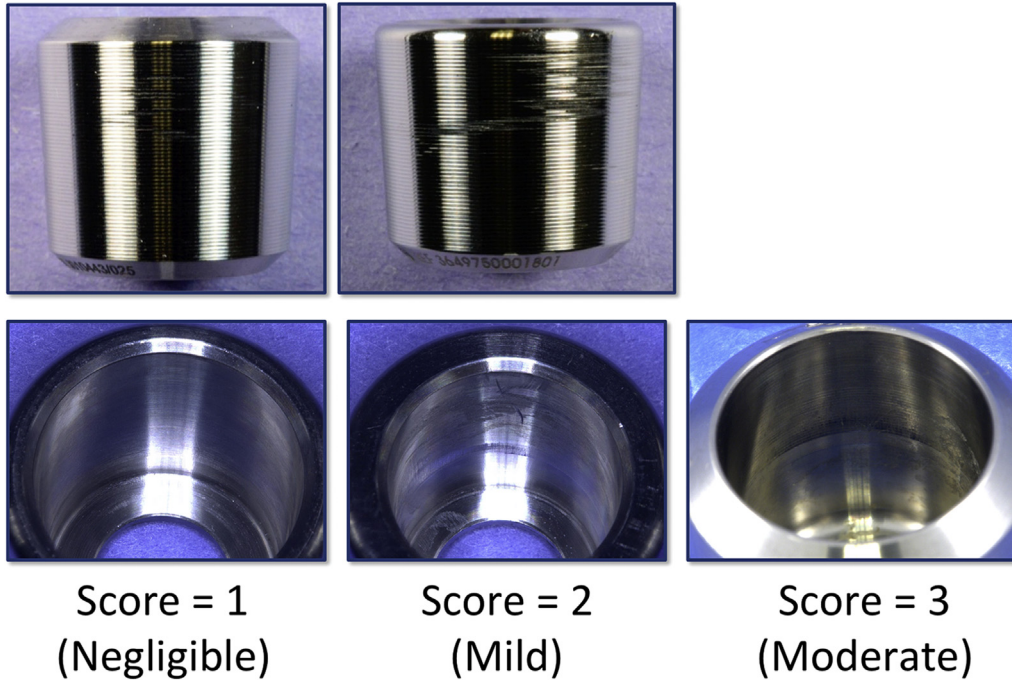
Examples illustrating the range of fretting corrosion scores observed on taper surfaces of the titanium alloy sleeves.
